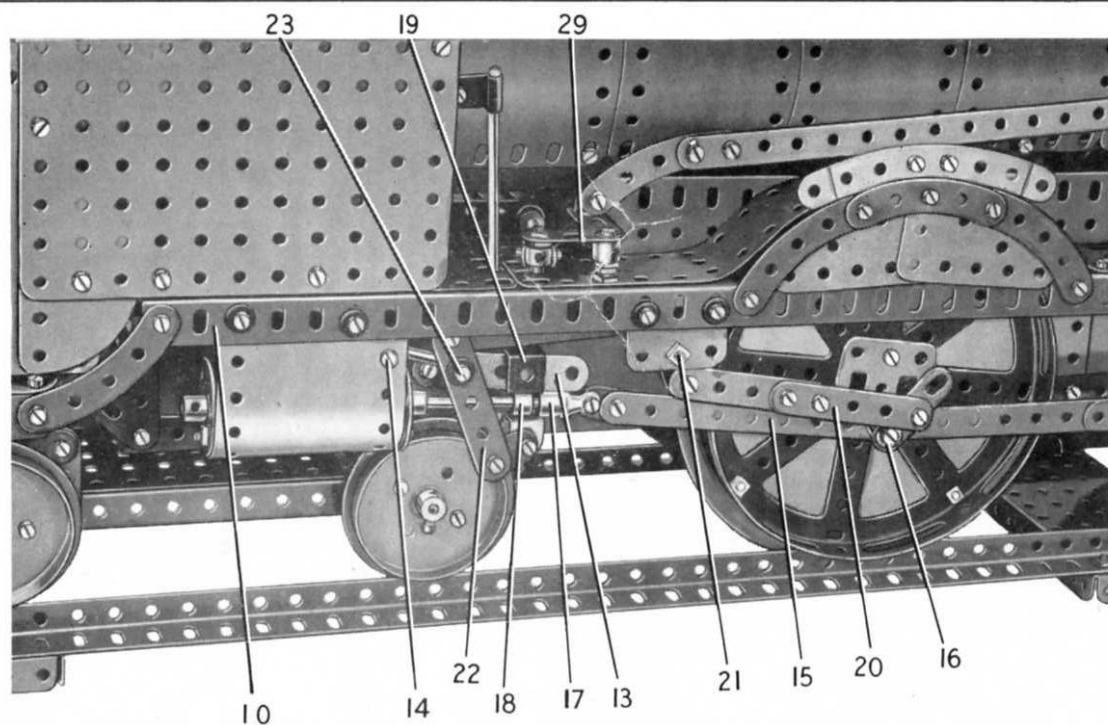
A close-up picture of the valve motion and cylinder assembly
